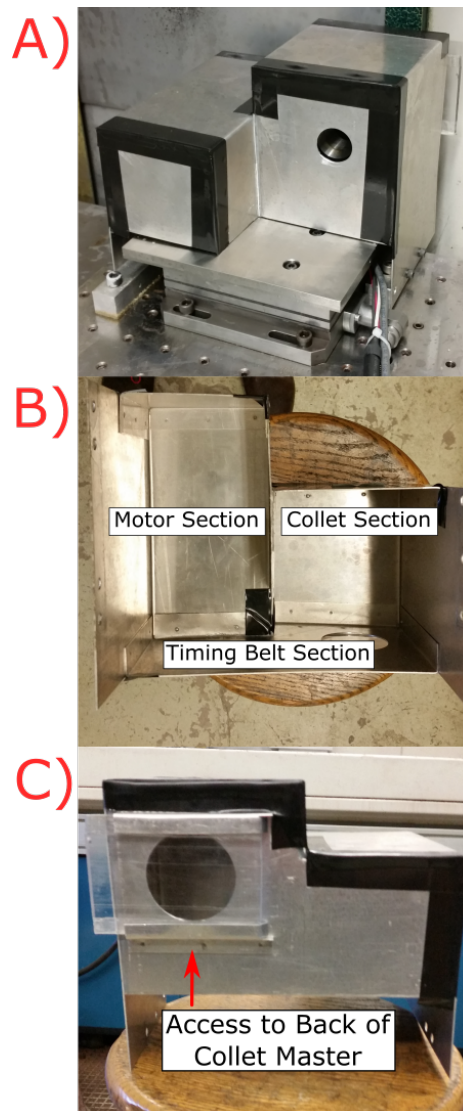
Aluminum waterproofing box showing: A) installed, B) internal sections to help prevent water ingress, and C) back access panel to Collet Master for workpiece changing
